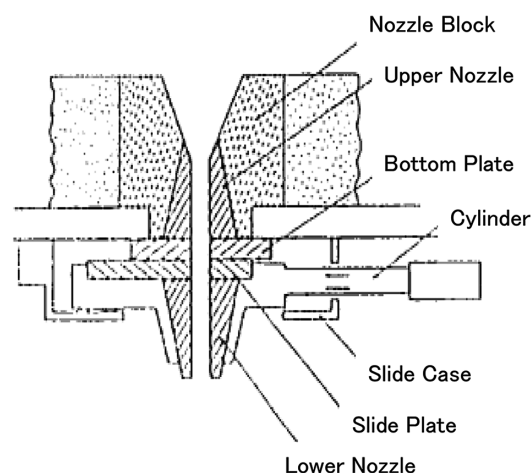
Typical parts arrangement of sliding nozzle⁶⁾
